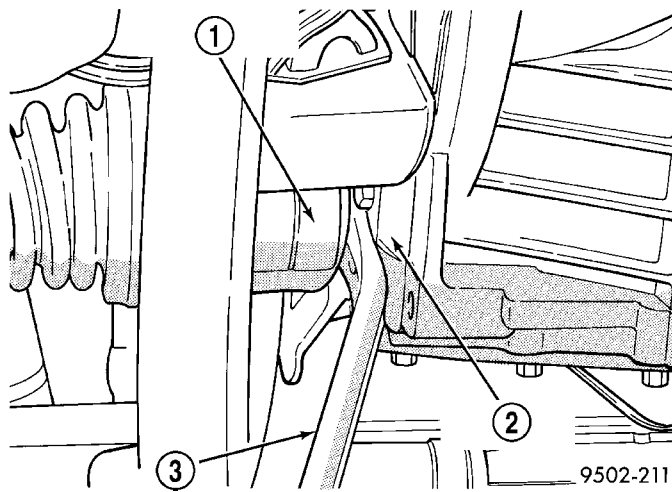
Disengaging Inner Tripod Joint From Transaxle
